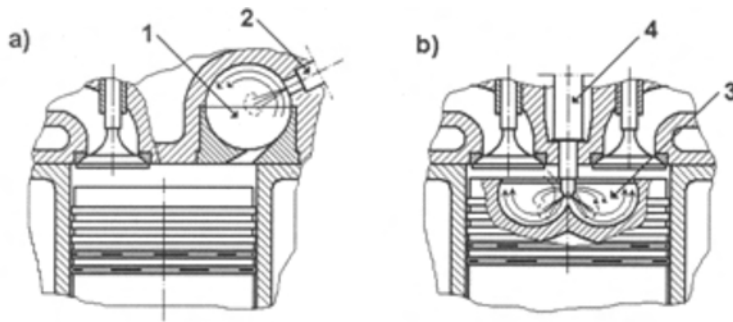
Combustion chamber of diesel engines: a) swirl chamber (indirect injection), b) formed in the piston crown (direct injection); 1 – swirl chamber, 2 – pintle nozzle, 3 – recess in the piston crown 4 – multi-hole nozzle (*arrows indicate the direction of the air movement inside the chamber)
